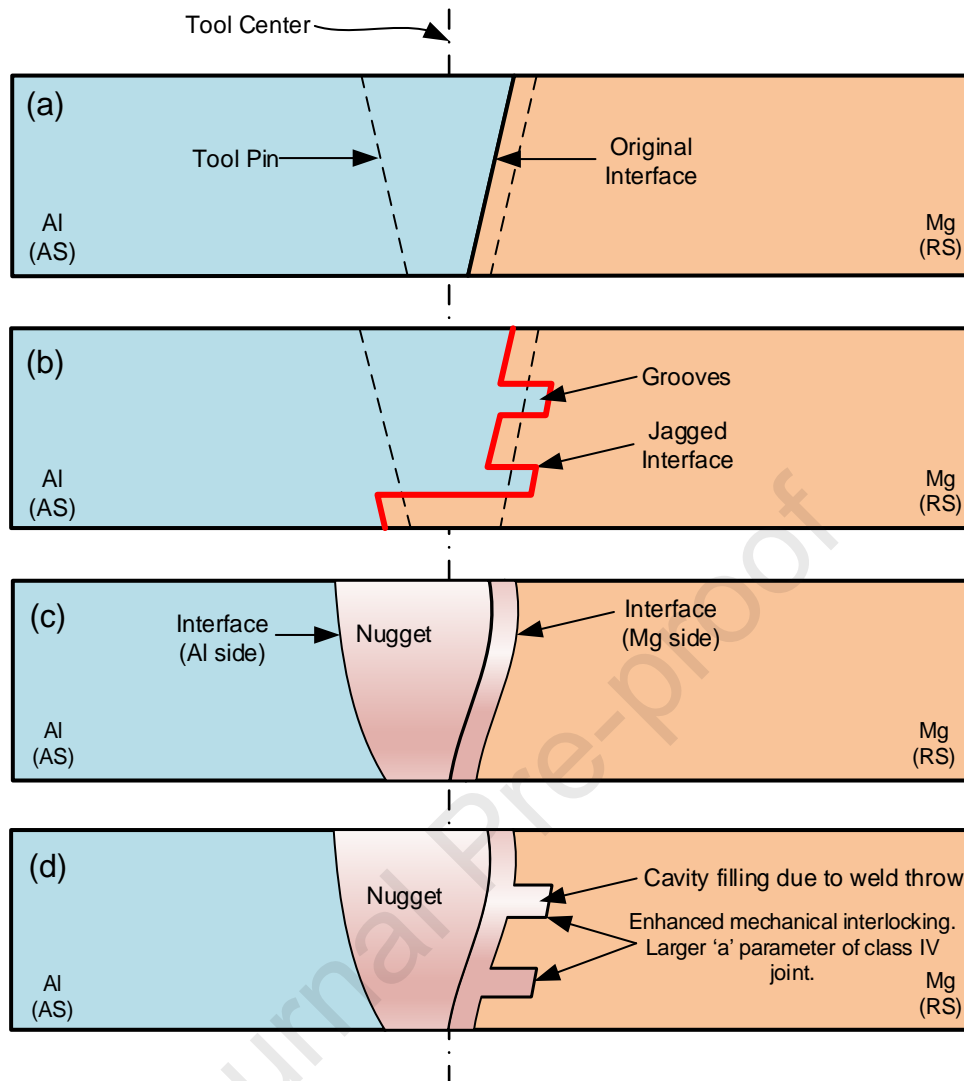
(a) Conventional butt joint, (b) Innovative butt joint with serrations to improve mechanical interlocking, (c) Weldment structure in conventional joint, (d) Weldment structure in innovative joint.
